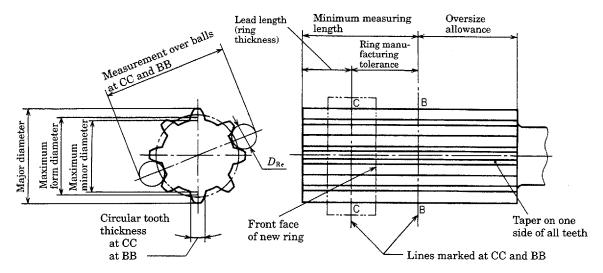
Tapered tooth master plug gauge for NOT GO composite ring gauge
